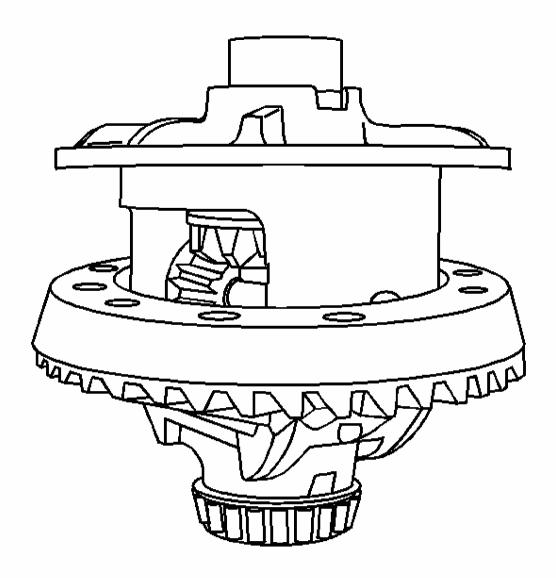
Ring Gear & Differential Case Courtesy of GENERAL MOTORS CORP.
